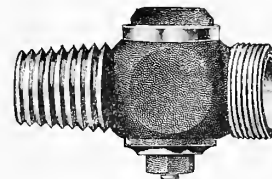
THREADED FOR IRON PIPE ON SHORT END, COARSE THREAD ON LONG END, FOR WOOD MAIN.
